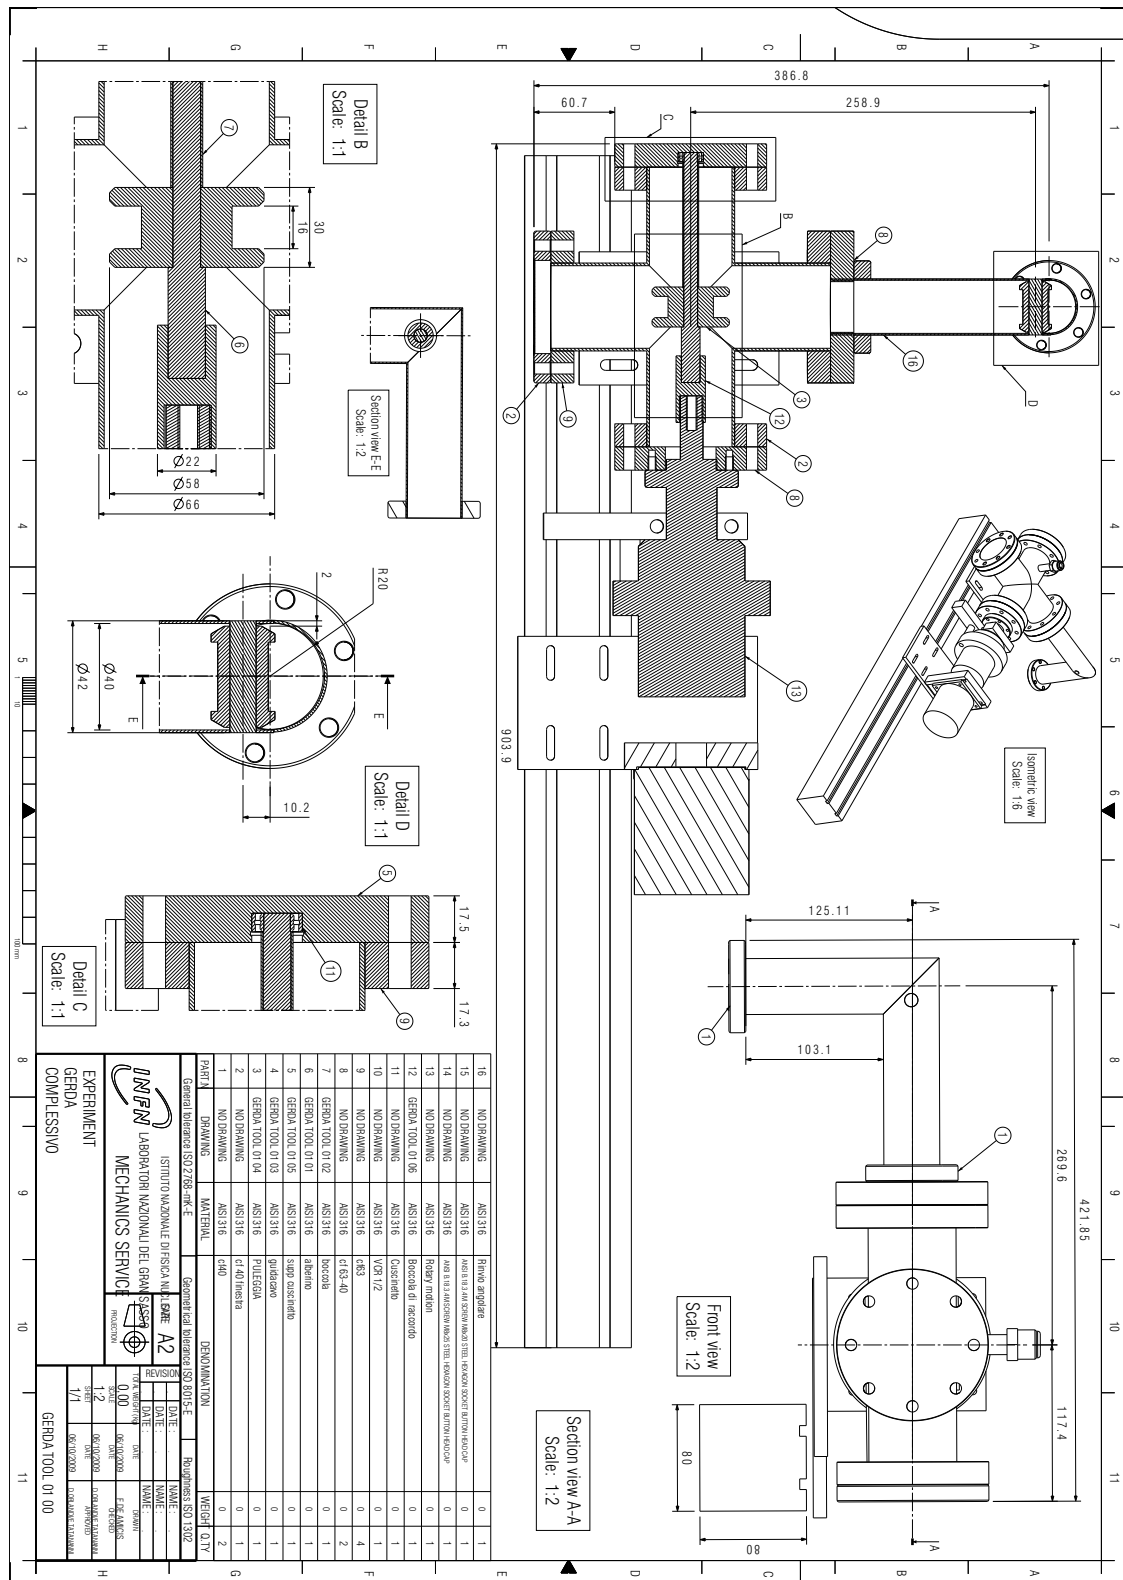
Technical drawing of the prototype calibration system as provided by LNGS.
